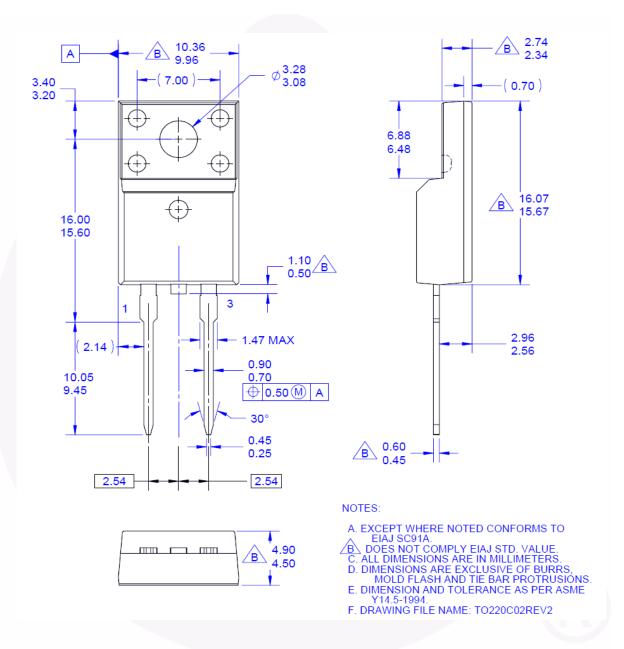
TO-220F 2L - 2LD; TO220; MOLDED; FULL PACK
